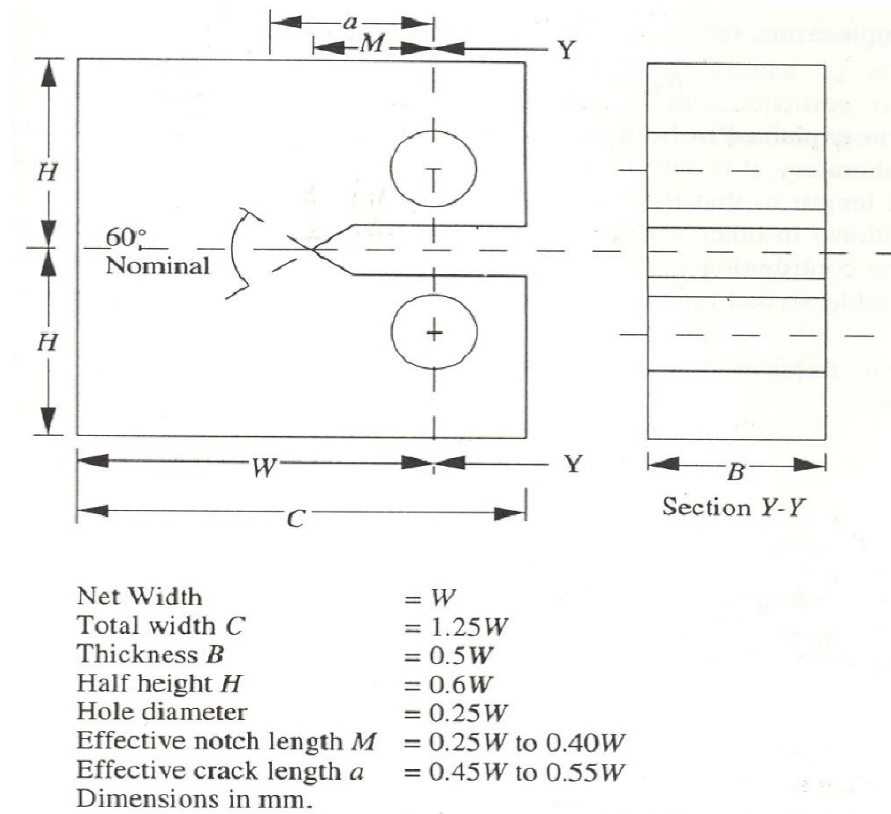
Shape and dimensions (mm) of (C-T) specimens (Knott and Withey, 1998)
